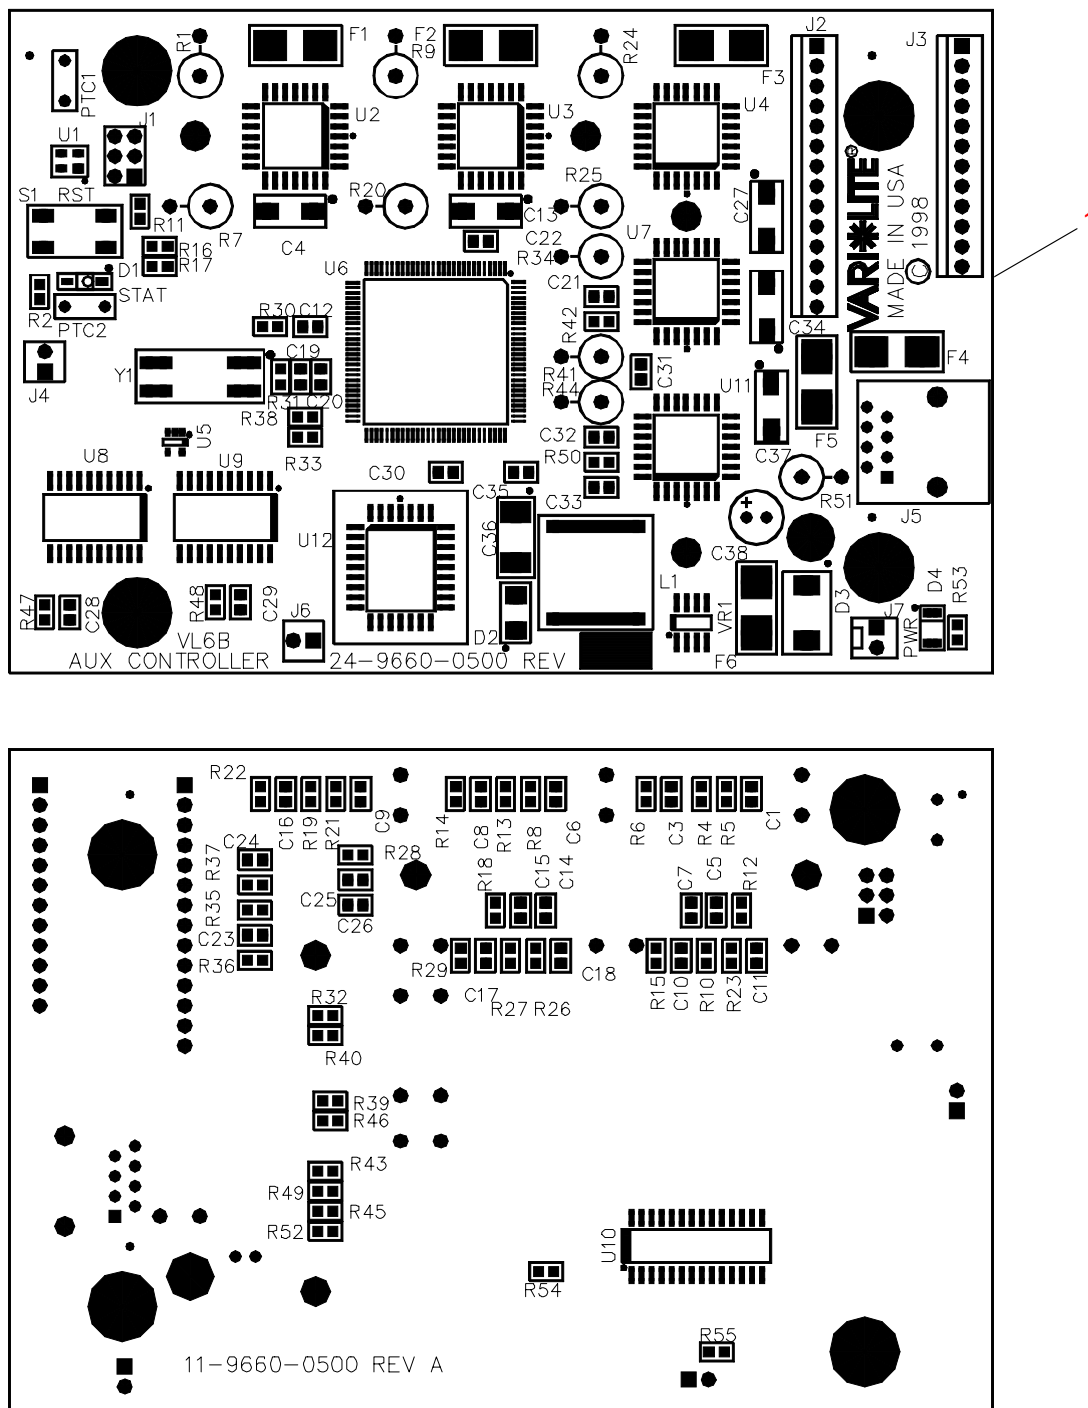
VL6B/VL6C Controller PCB Assembly
